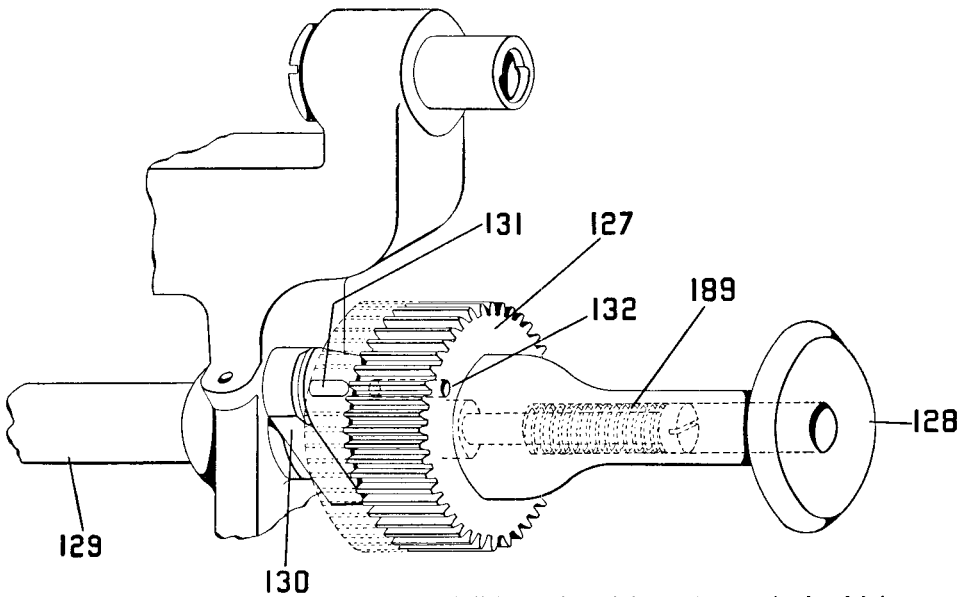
Another diagram of the mold-disk turning pinion 127. 129 is the driving shaft for the mold disk, running from front to rear of the machine. Mounted on the shaft 129 is a sector 130. In this sector 130 is a pin 131. In the mold-disk turning pinion there is a hole passing entirely through it 132. The shaft 129 drives mold-disk pinion 127 through pin 131. When the mold-disk turning pinion 127 is pulled backward by hand, pin 131 is disengaged and the mold disk can be turned by hand. Inside of mold-disk turning pinion 127 there is a spring which urges it toward the rear of the machine and holds it in place when pin 131 is seated in the pinion.
